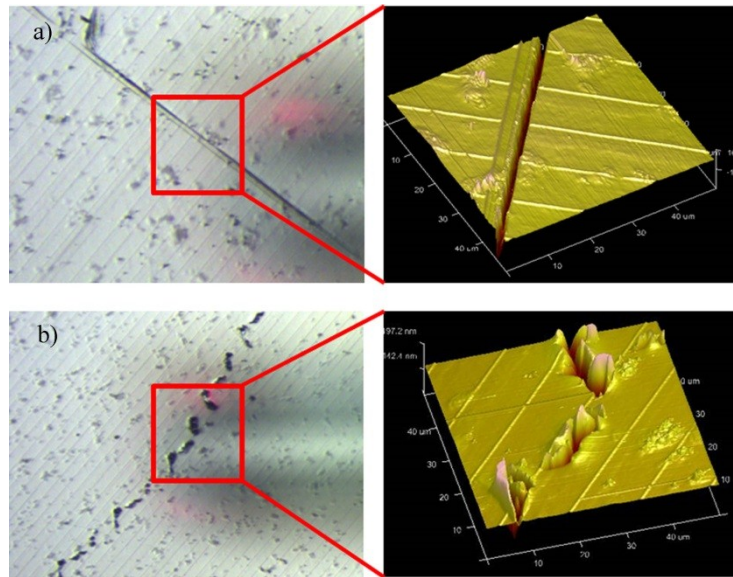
Typical defects on the machined alumina surface: a) scratch, b) pit and protrusion.
